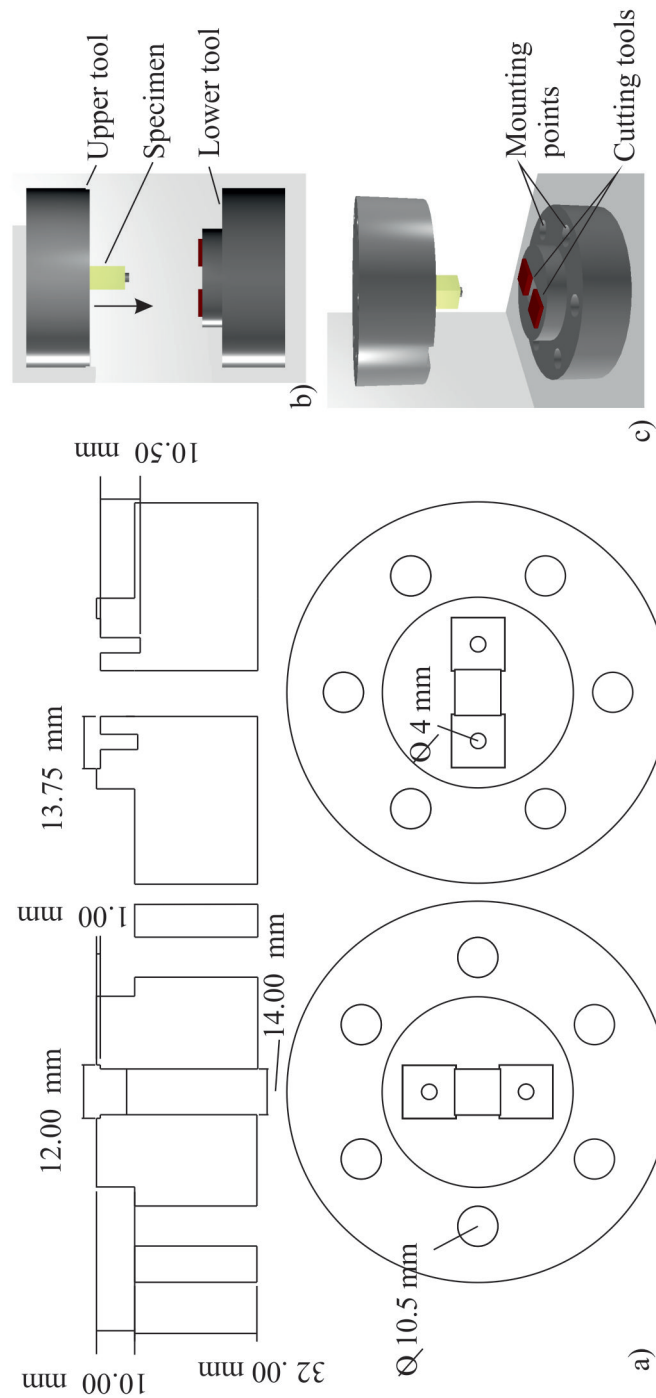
a) Schematic depicting mounting base and mounting point arrangement b) Cross section of Mk II OCR, indicating direction of movement and c) perspective view of CAD design Mk II OCR.
